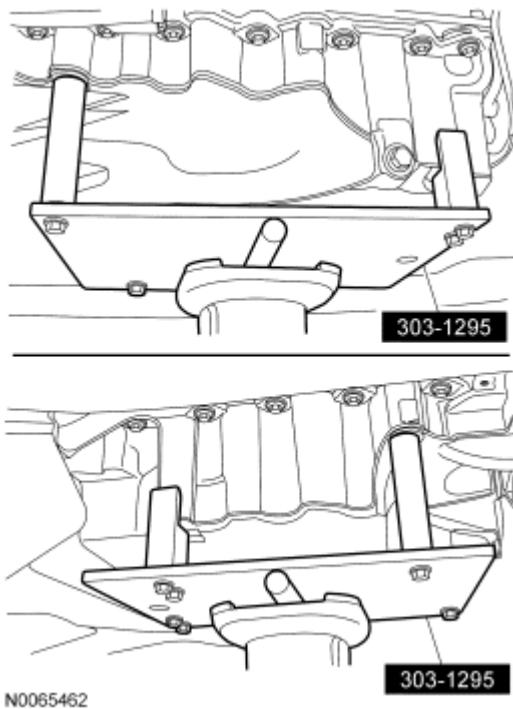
Positioning Floor Jack & Special Tool (303-1295) Under Oil Pan
